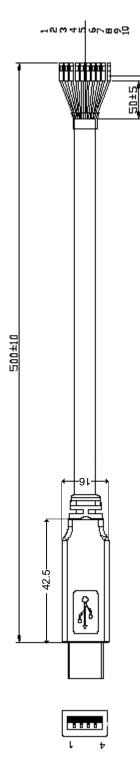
C232HM MPSSE Cable Mechanical Details (dimensions in mm)
